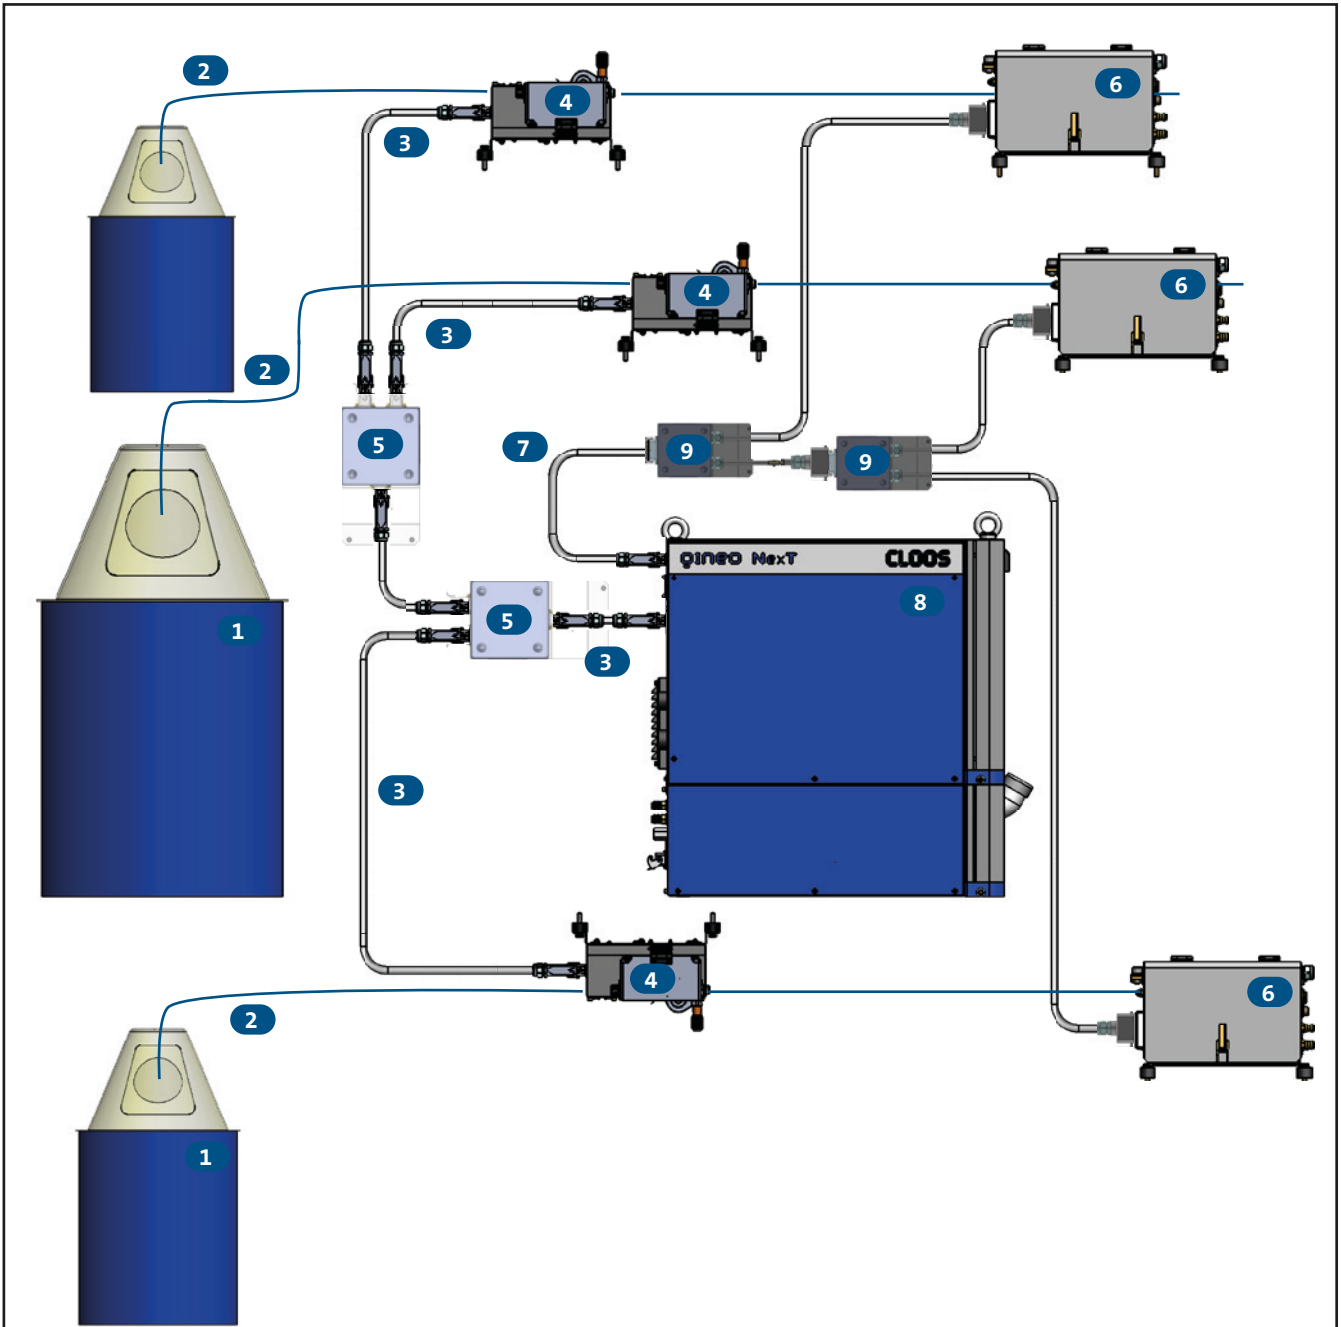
QWD-B-H connection diagram for the single wire welding process with Qineo Next
